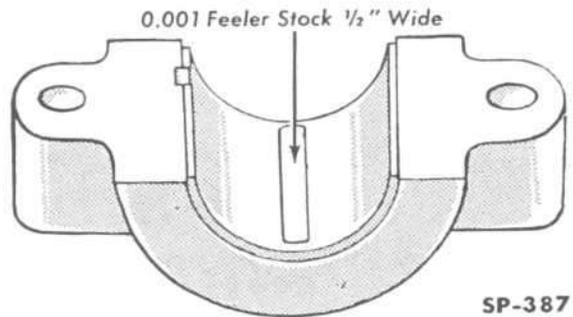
SHIM STOCK IN POSITION ON MAIN BEARING
